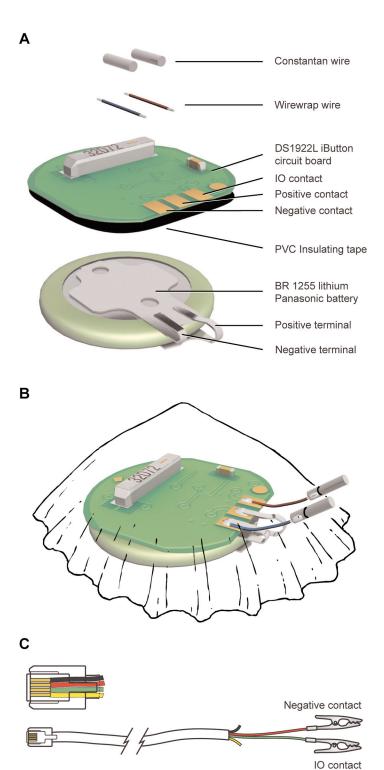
(A) Exploded view of the different parts used for robolimpet assembly. (B) Schematic view of the assembled electronics inside a limpet shell. (C) Wiring for the connection cable to service robolimpets.
